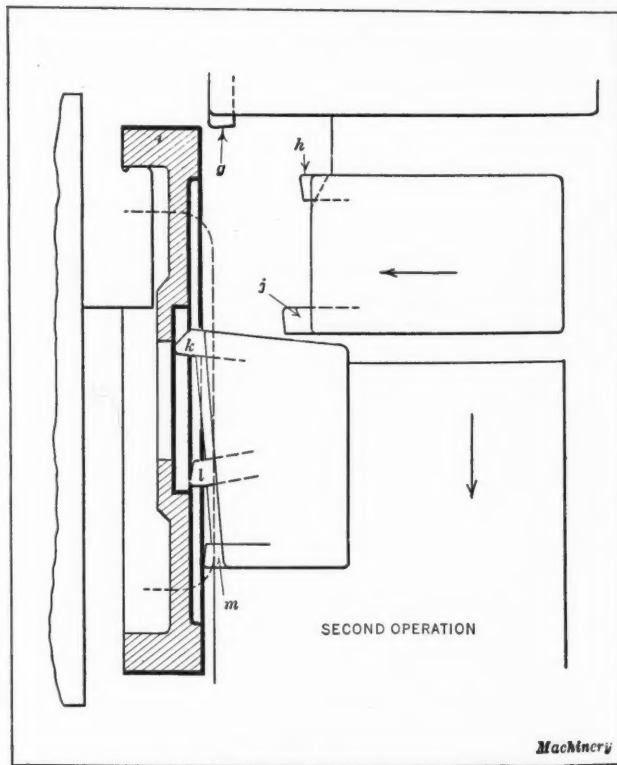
Lay-out of the Tooling Equipment furnished on the Machine used in the Second Roughing Operation
